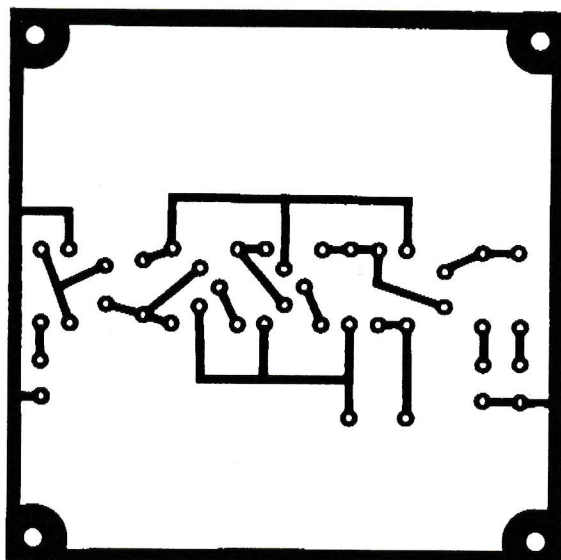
(c) Circuit board foil pattern for the center channel board.
